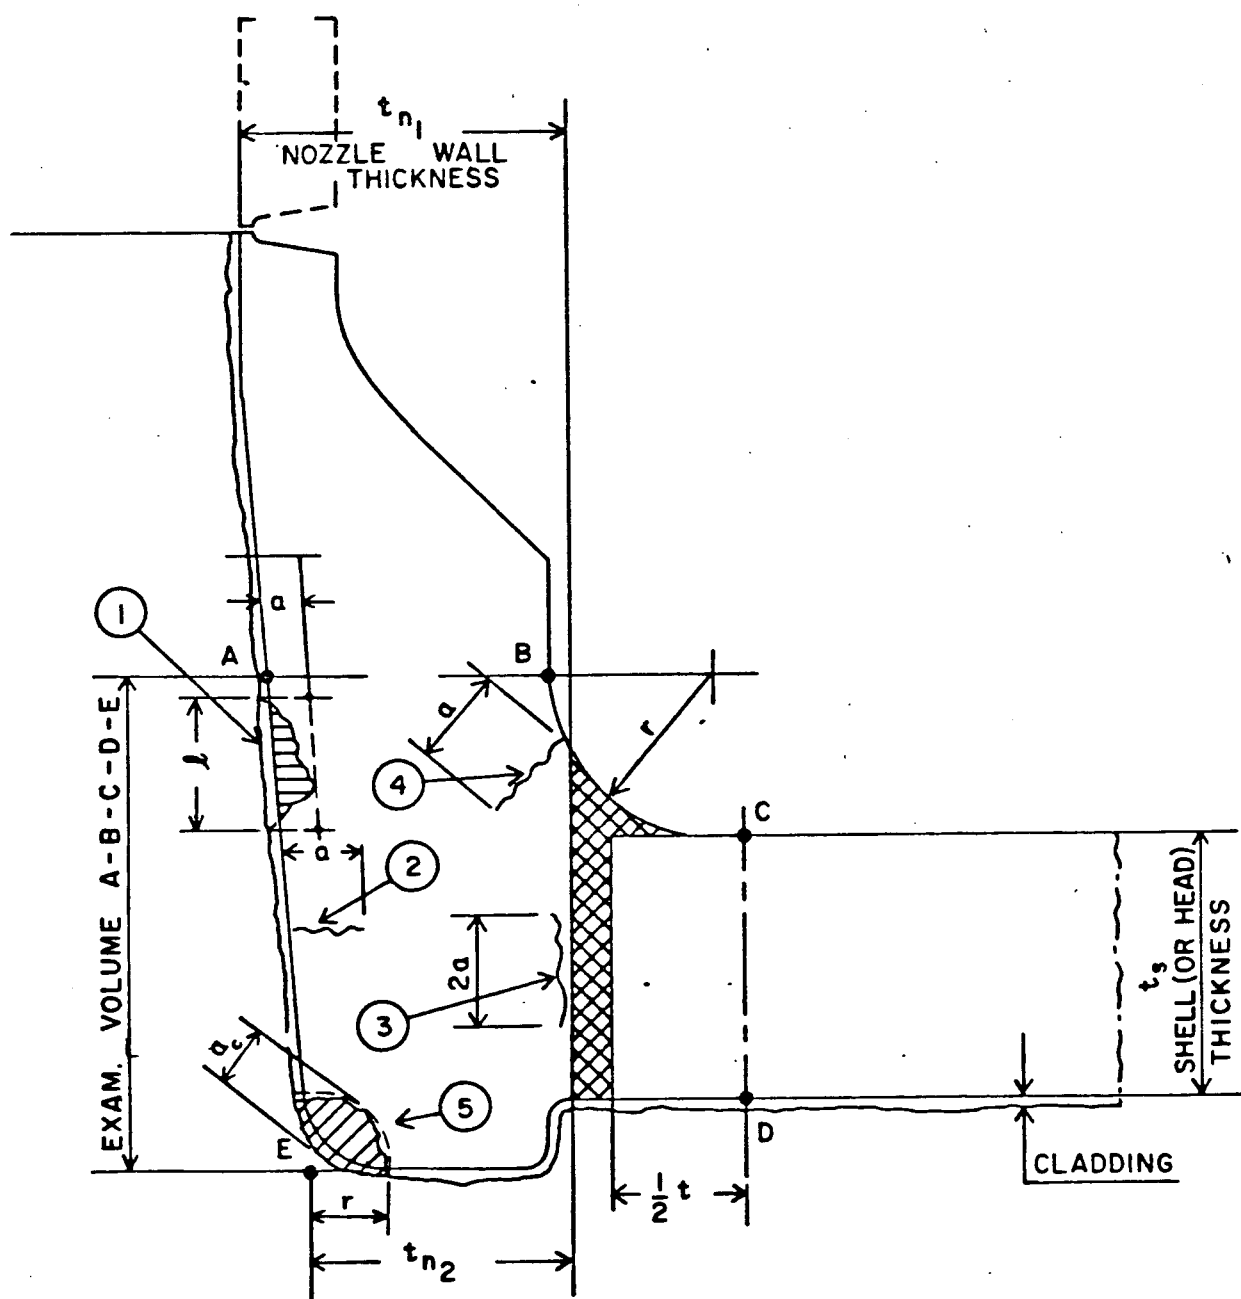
PIPE BRANCH CONNECTION
